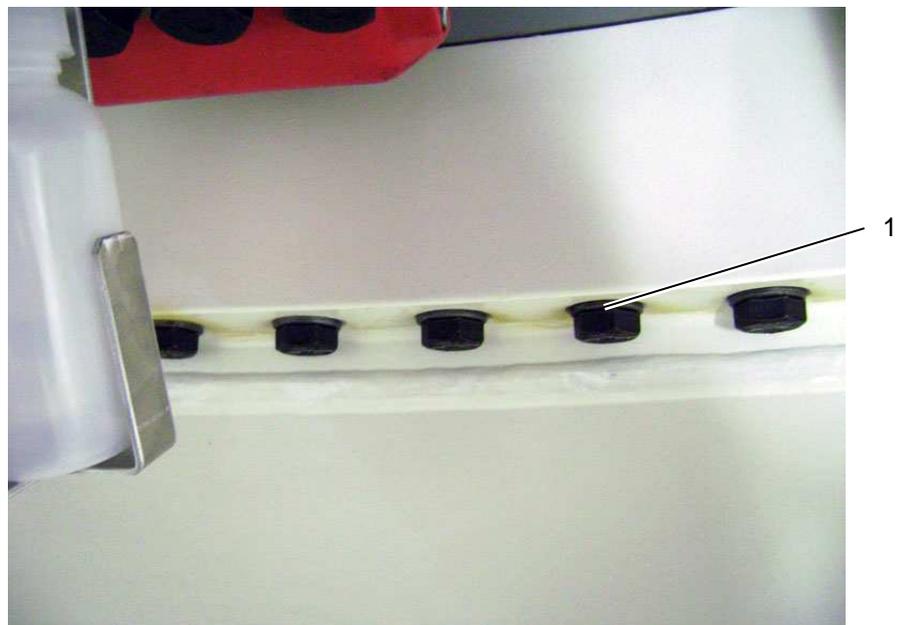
1 Screw connection between the yaw bearing and the tower head
